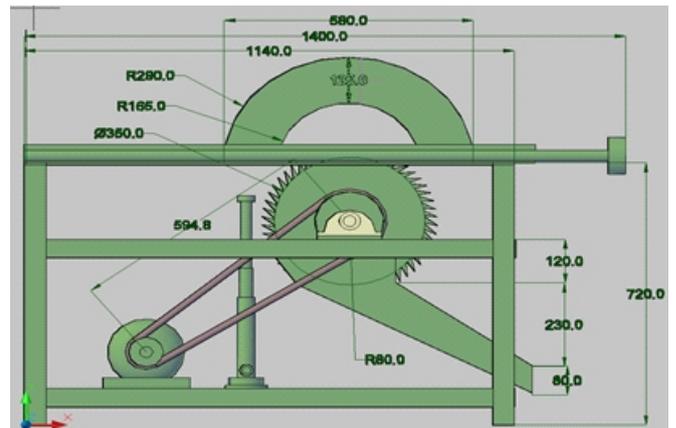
Orthographic View of the Improved Design Plank Sawing Machine
